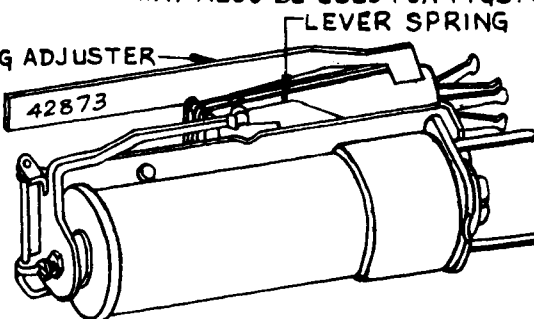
ADJUSTING LEVER SPRINGS FOR TENSION
